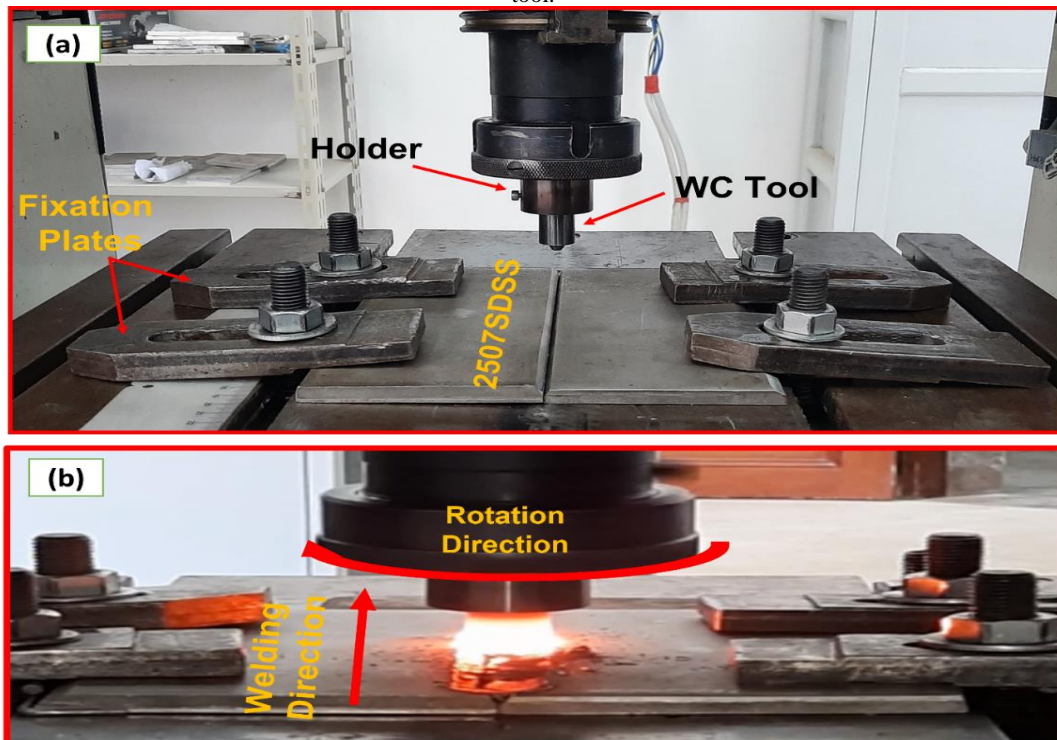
(a) FSW facilities and fixture plates, (b) photograph during friction stir welding of SDSS.
